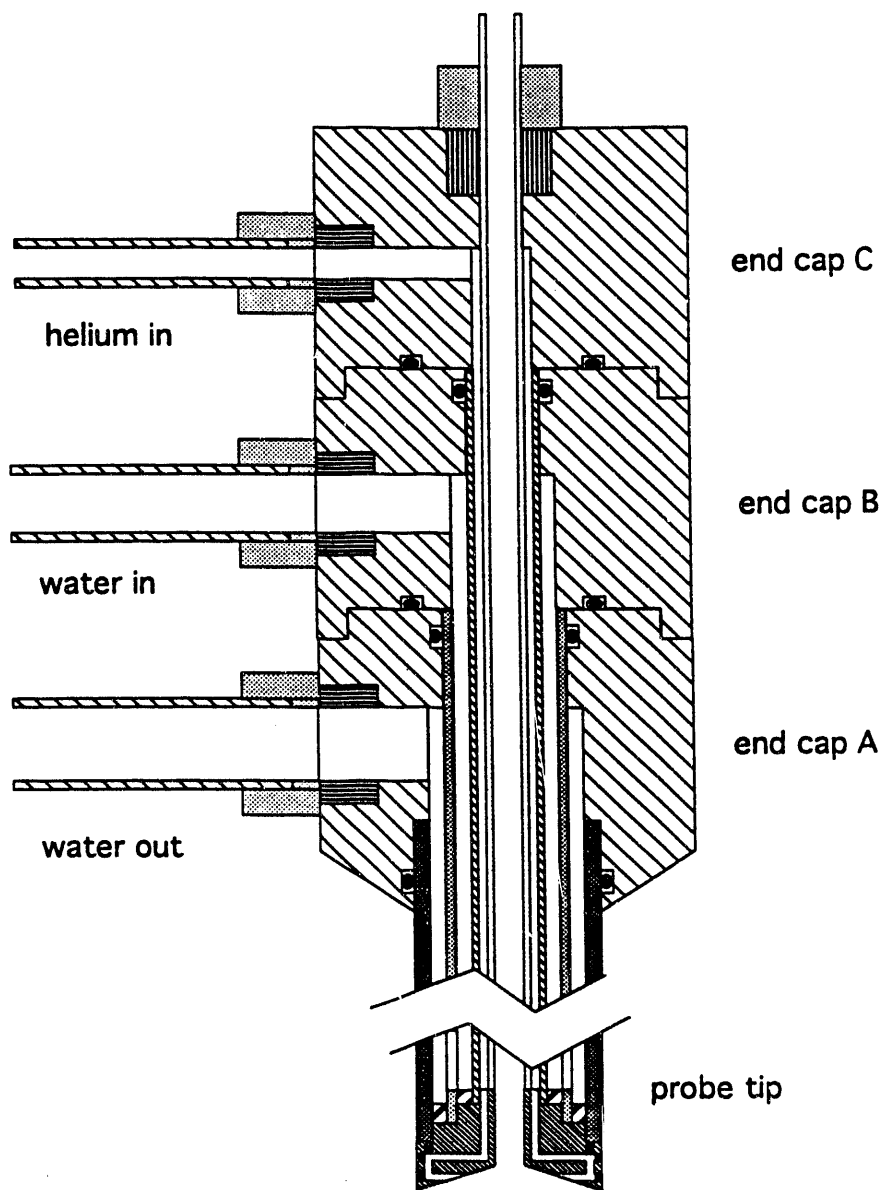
Drawing of the solids-sampling probe. It consists of four concentric stainless steel tubes of approximate length 51 cm held in place by three end caps containing ports for helium quench gas and cooling water. Helium quench gas is exhausted at the probe tip.
